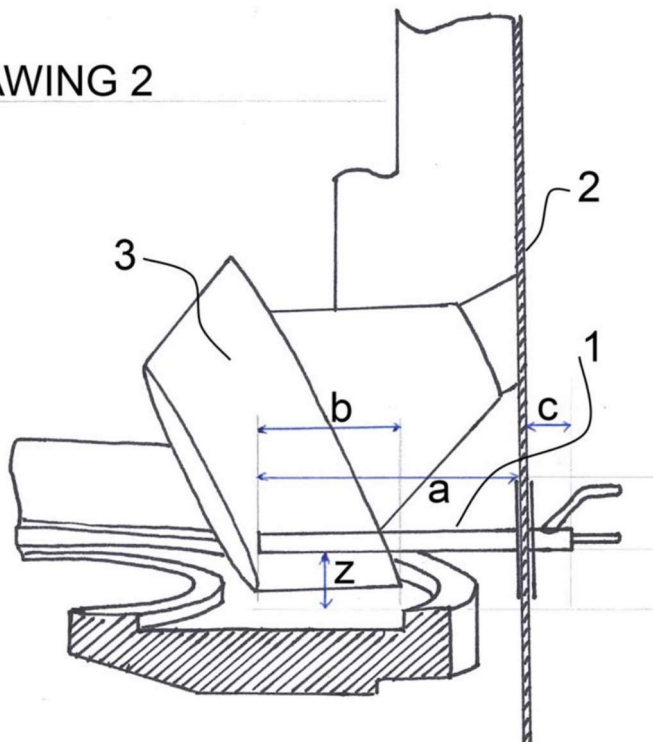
1) dosing lance, 2) wall of the mill, 3) roller.
